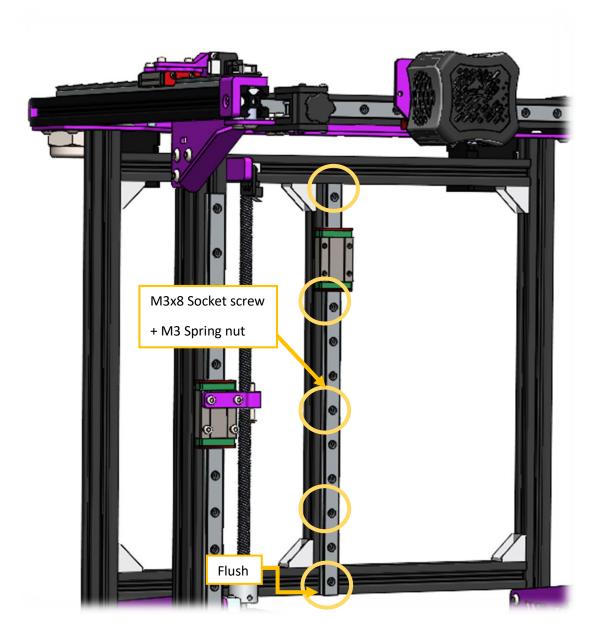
Fix rail with M3x8 Screws + M3 Spring nuts were indicated with circles
